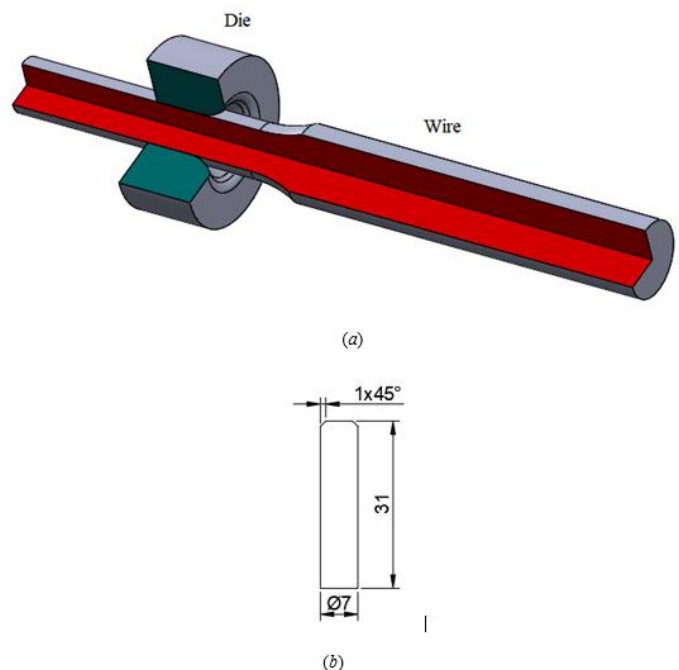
(a) Schematic illustration of wire drawing (b) Wire dimensions (units in mm)
